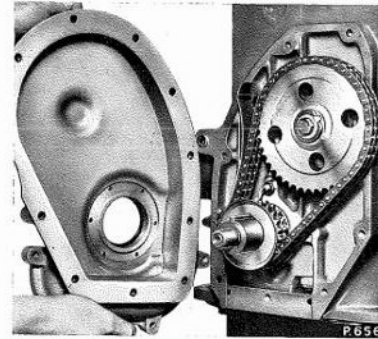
Camshaft drive arrangement, showing the location of the tensioner blade
